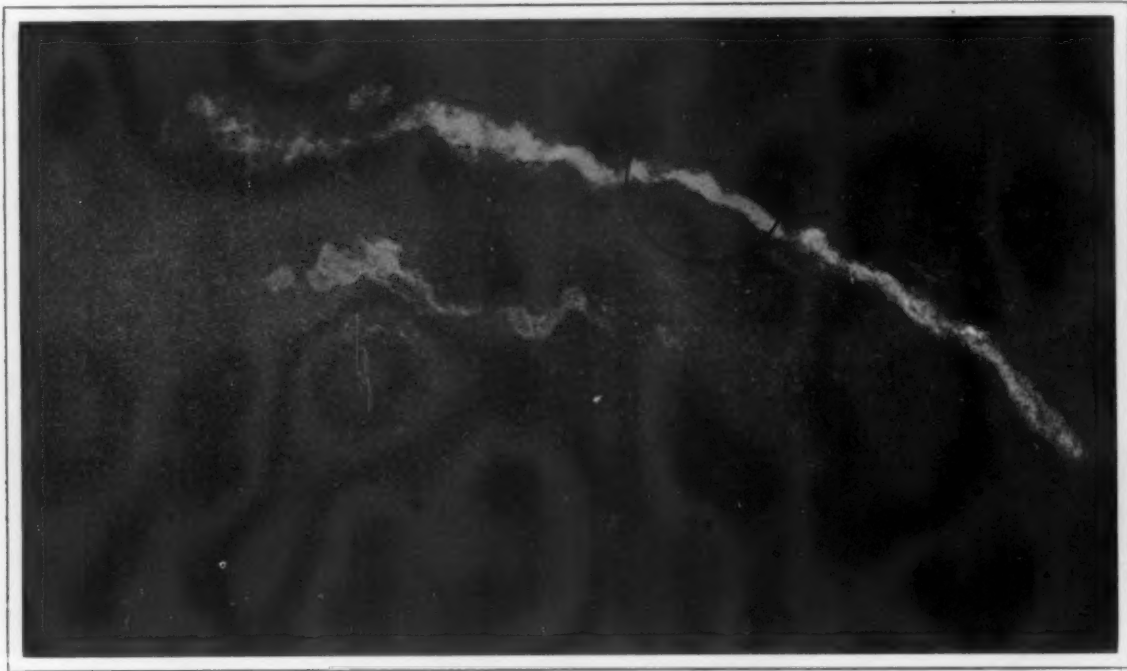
Radiograph of a Steel Casting Showing Flaw in the Center of the Casting. The Circle Shows Where a Piece Was Later Punched from the Casting
